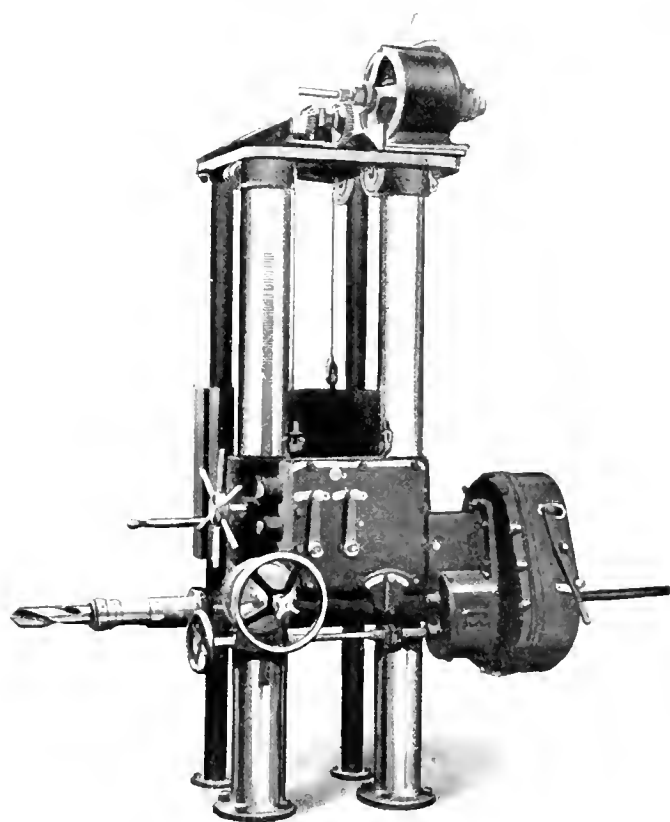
No. 5 Machine, with Frame built up of Cylindrical Members
